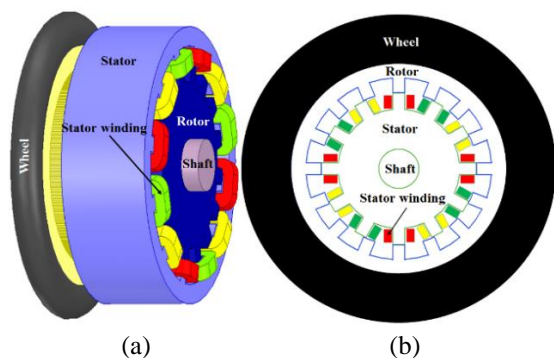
(a) Complete view of conventional RFSRM with wheel arrangement. (b) Outer rotor arrangement of conventional 12/16 RFSRM.
